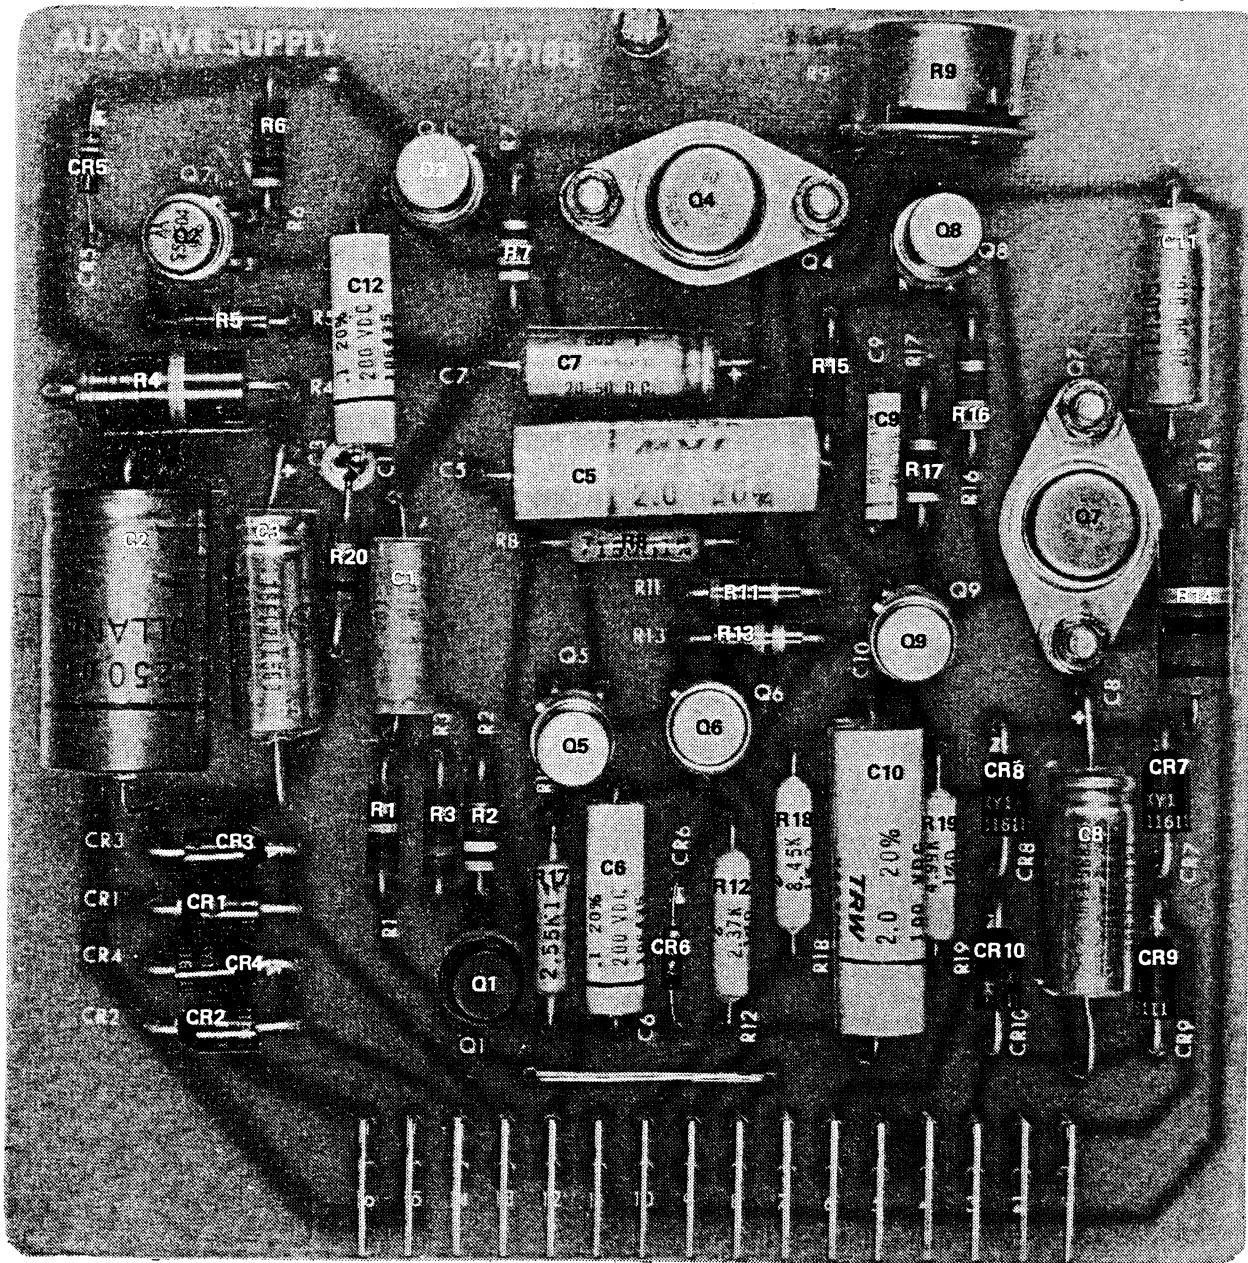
+25 AND -15 VOLT POWER SUPPLY ASSEMBLY
